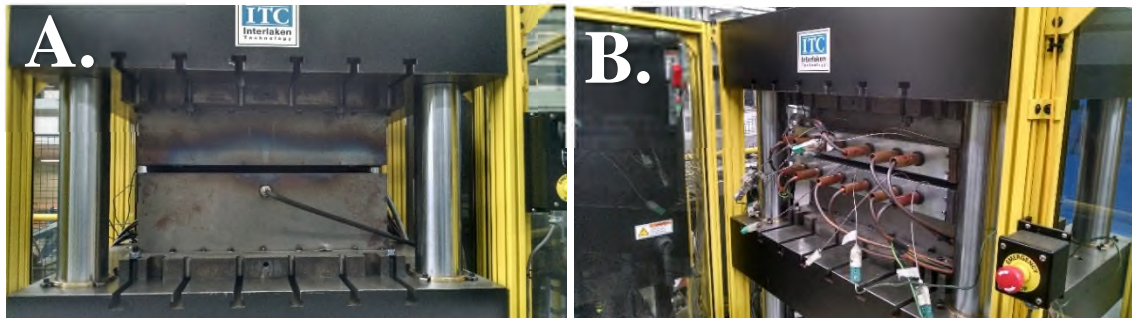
a) Tool loaded in press, b) reverse of tool showing heaters and thermocouples.
